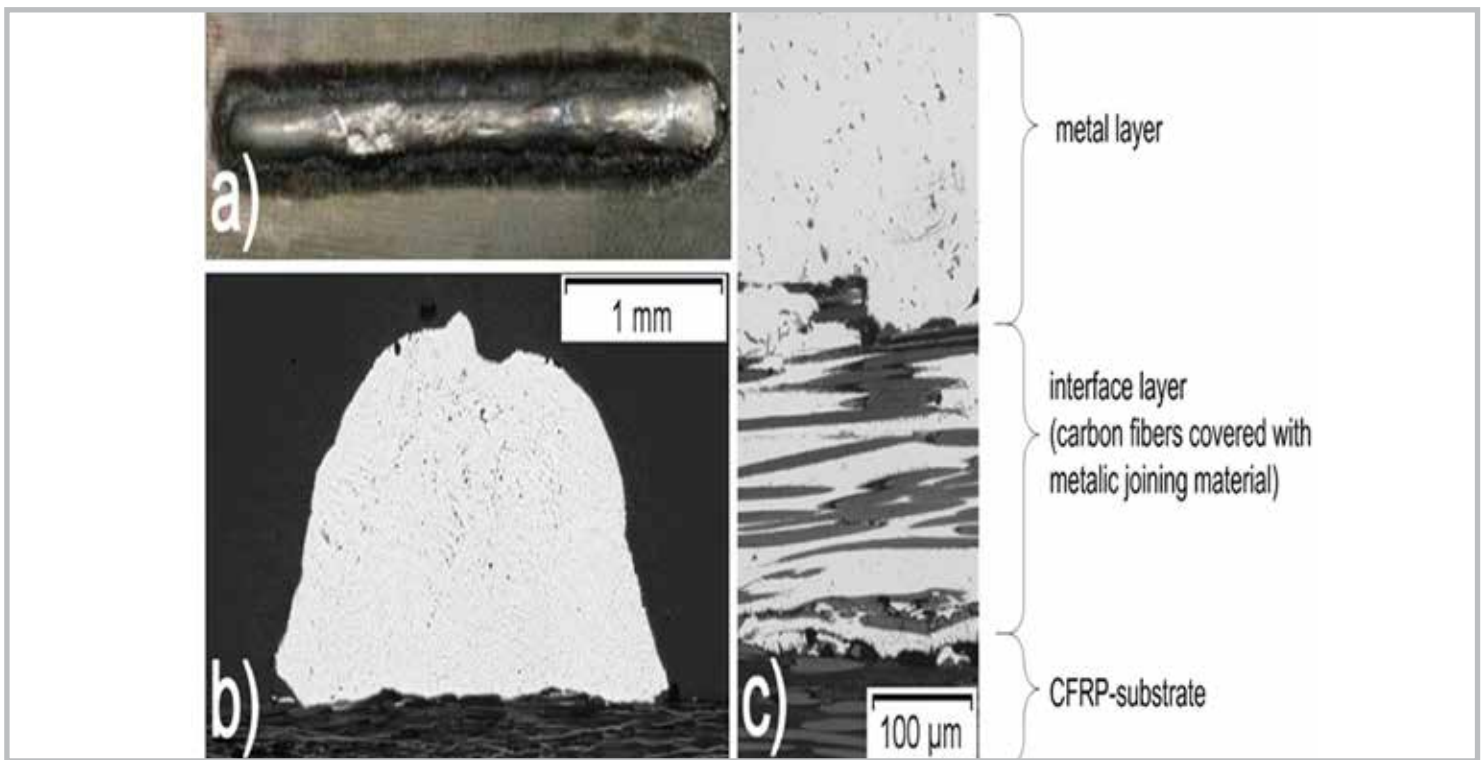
Laser-generated metal-CFRP bond - a) top view, b) cross section, c) details of the cross sections
